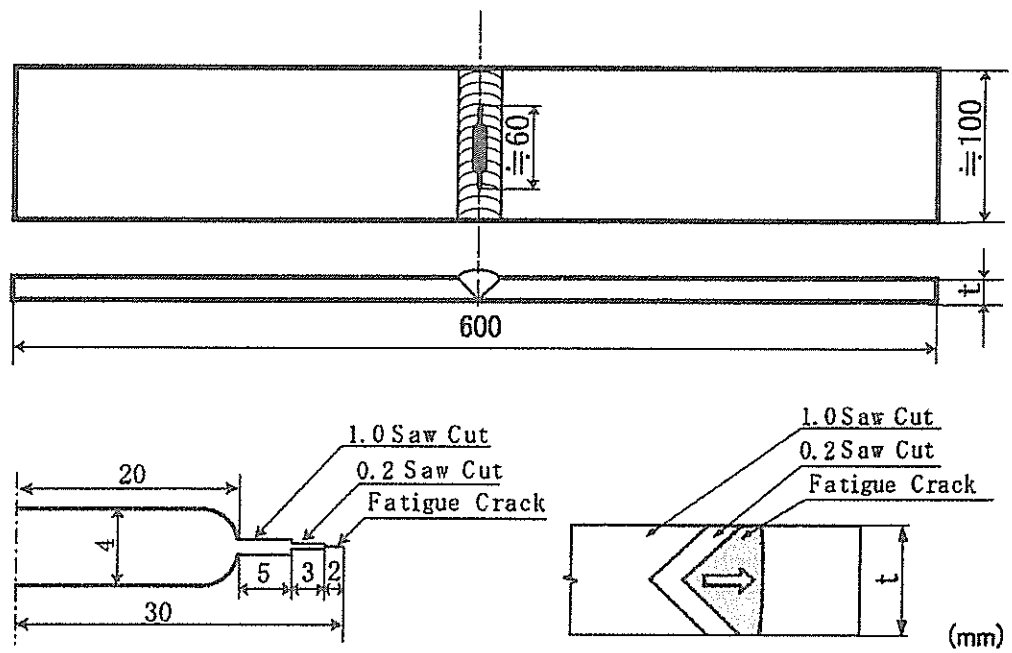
Shape and size of center notched tensile fracture toughness test specimen
